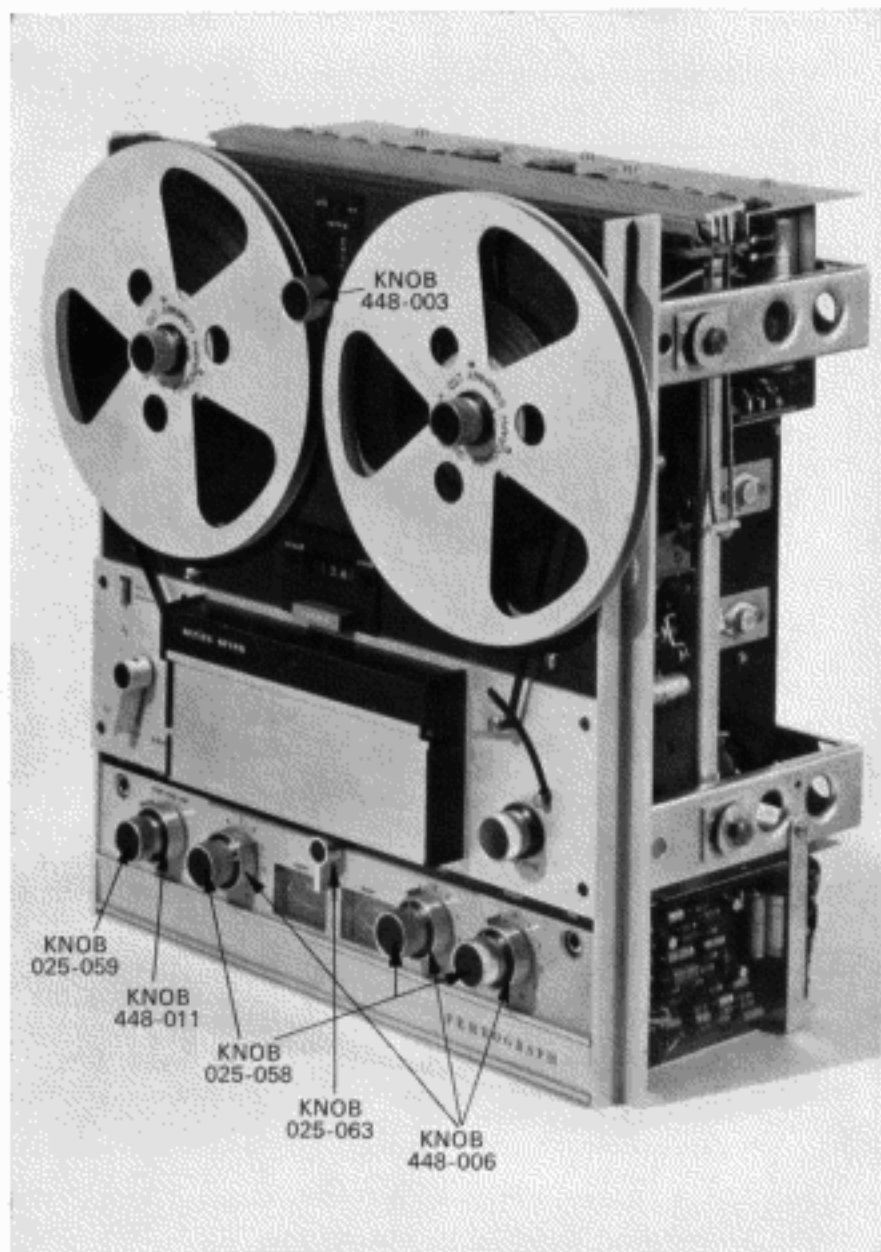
RECORDER CHASSIS—FRONT VIEW
